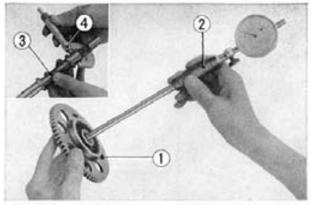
① Kick gear ③ Kick starter shaft ② Inside dial gauge ④ Micrometer
